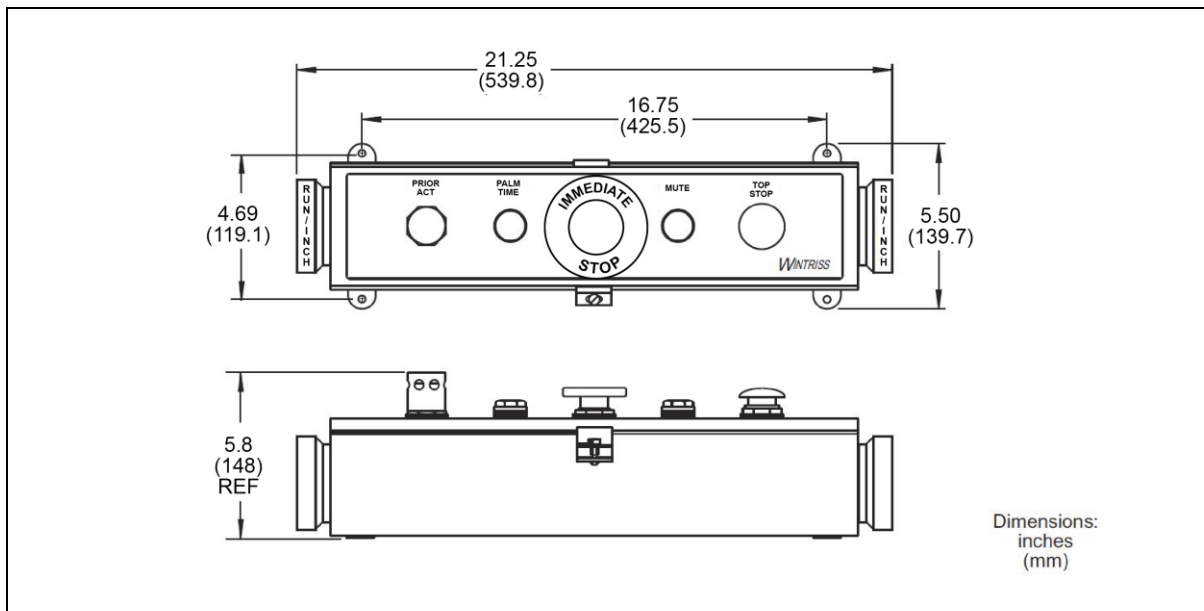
Pre-wired Operator Station with Side Run Buttons: Mounting Dimensions
